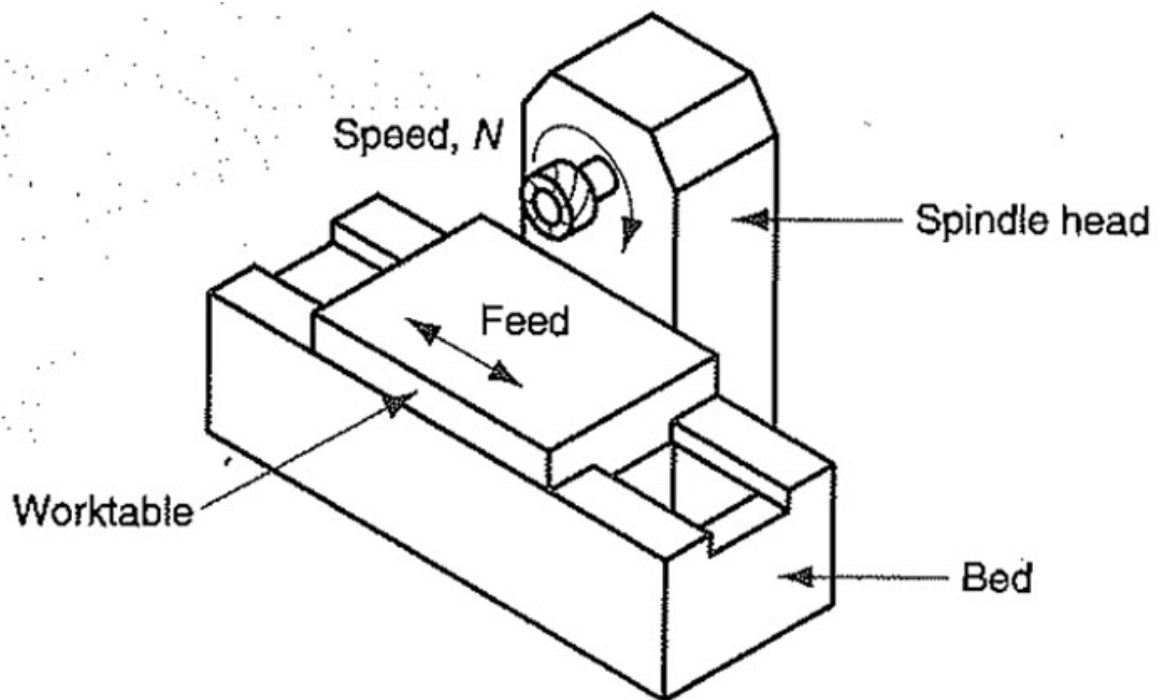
Simplex bed-type milling machine horizontal spindle.
